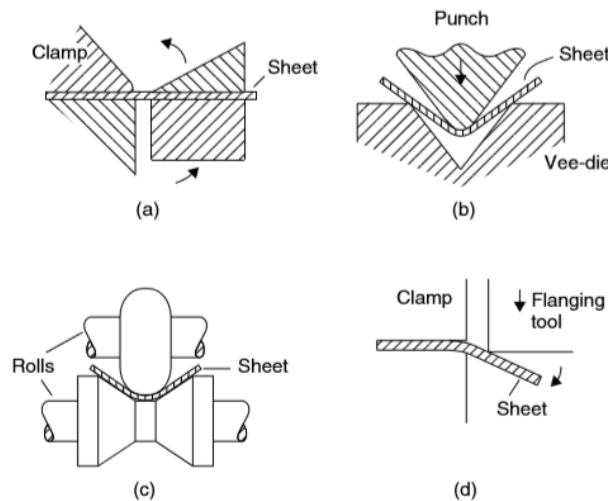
(a) Bending a sheet in a folding machine. (b) Press brake bending in a vee-die. (c) Section of a set of rolls in a roll former. (d) Wiping down a flange. [4]
